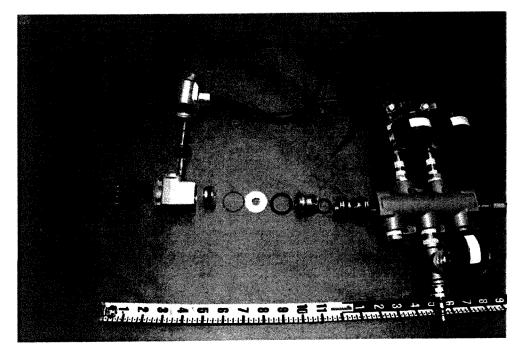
Close View of Exemplar Versa Bottom Dump Valve Components
